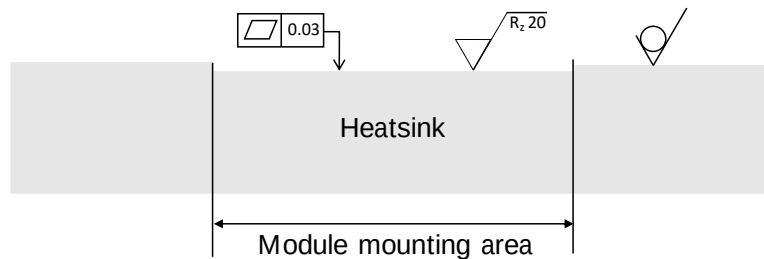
Heat Sink's Surface Requirements to Mount Power Modules
